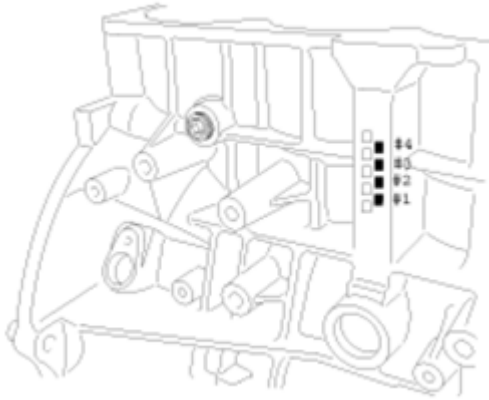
Identifying Cylinder Bore Size Code On Cylinder Block
